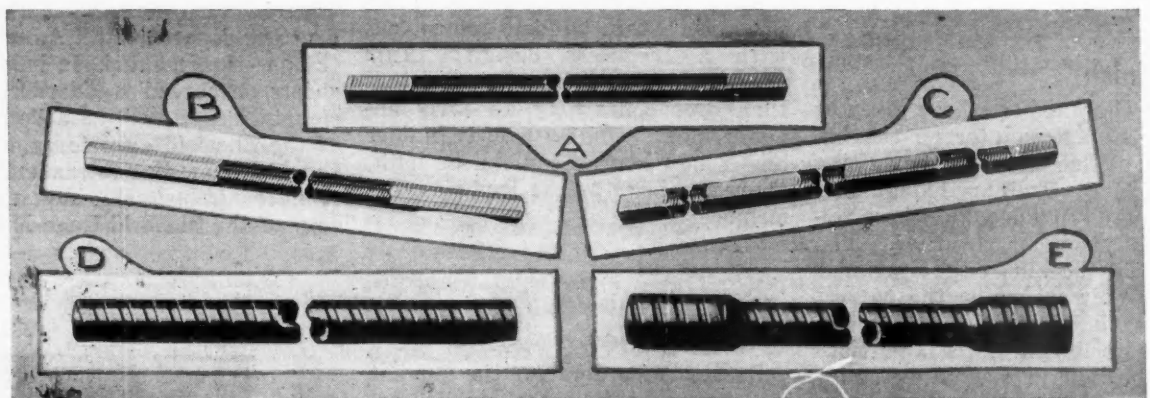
Standardized forms of remote control shafts and casings. Casing E, with enlarged ends permits the use of shaft end fittings up to $\frac{3}{8}$ in. diameter
